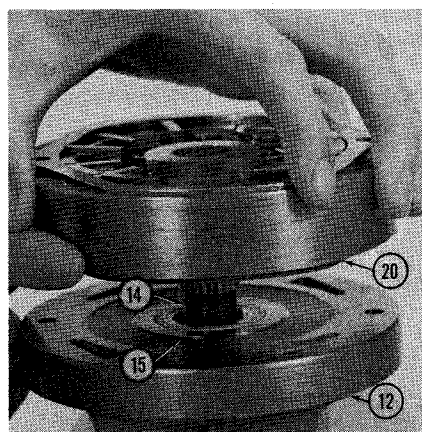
Lifting the motor ring, rotor and vane assembly (20) from actuator shaft (14) and housing (12).
